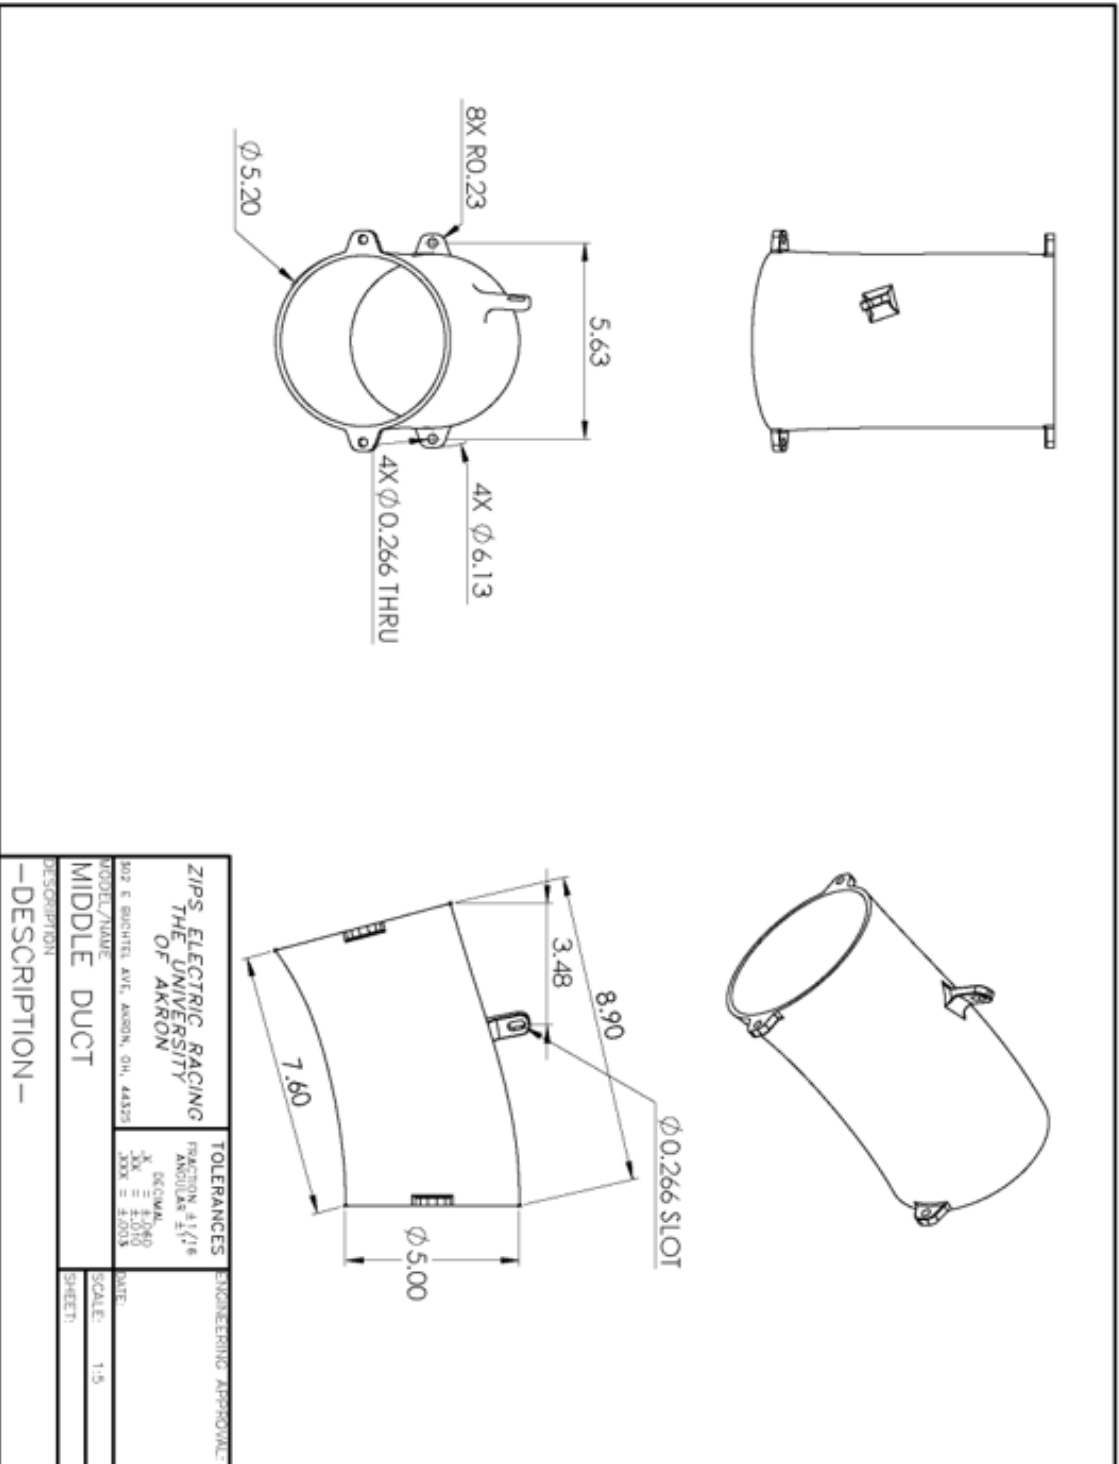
3D Printed Duct Piece that is Suspended Over the Accumulator
